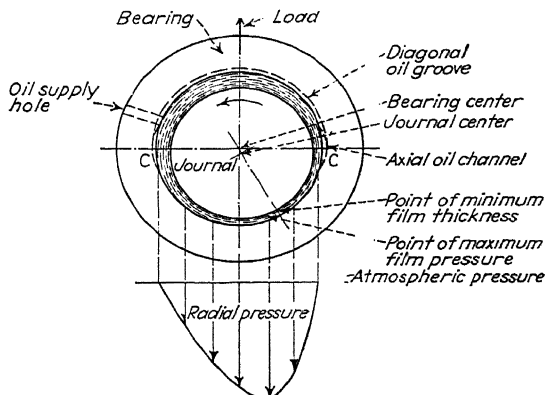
Oil-film pressure in a bearing having an oil groove and a channel cut in the unloaded side.
